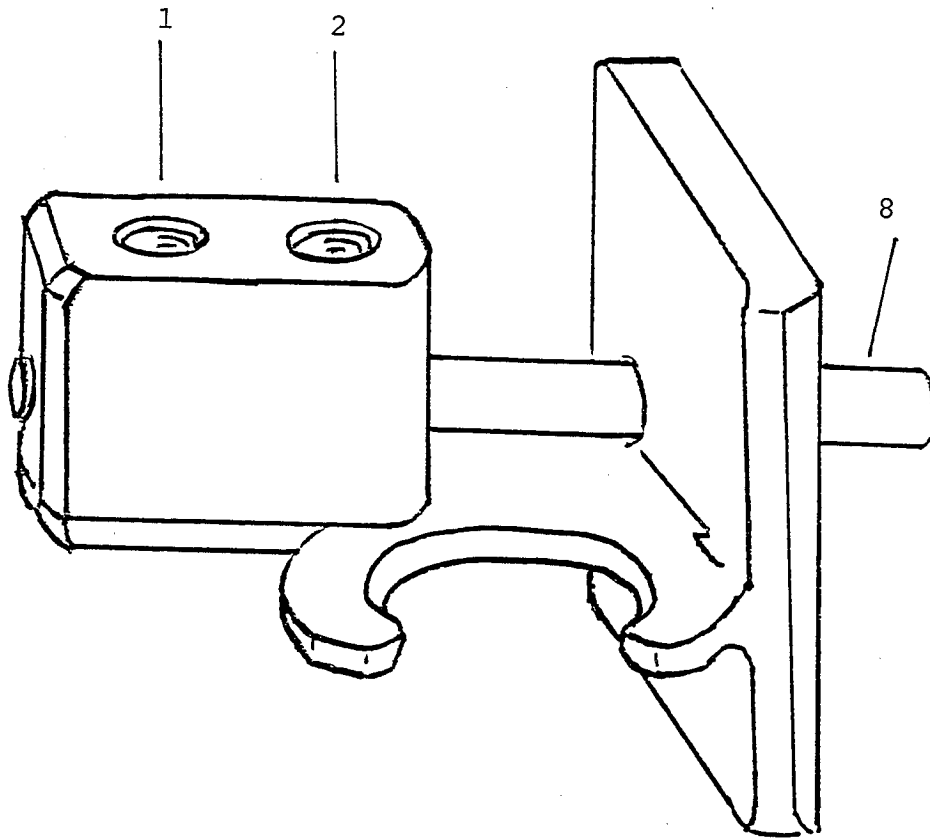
Schematic Drawing of Abrasive Jet Cutter.
